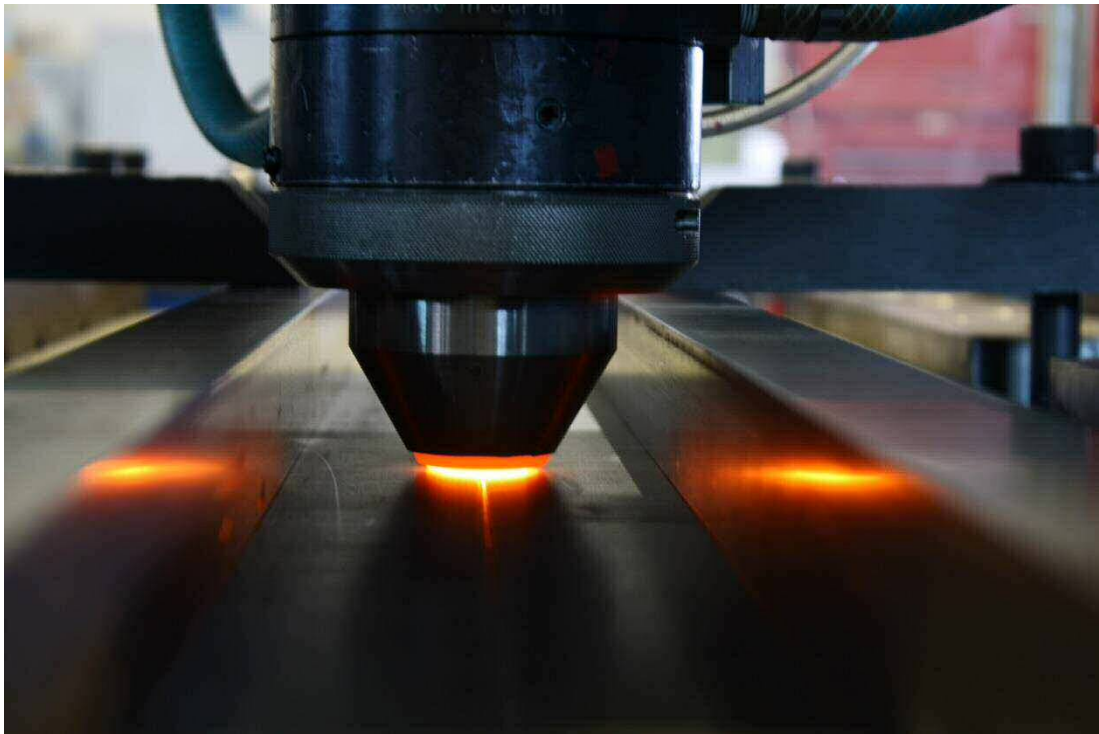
FSW tool for steel during operation (Courtesy of TWI Technology Centre)
